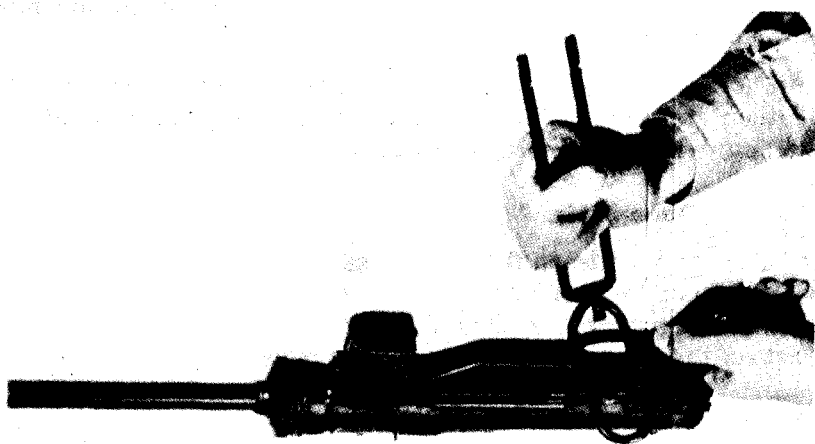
To remove the trigger guard, place one side of the shoulder rest of the stock on the housing assembly, against the trigger guard, and pry the trigger guard out of the pistol grip. Rotate the trigger guard toward the front of the weapon, and unhook the trigger guard from the housing assembly.
